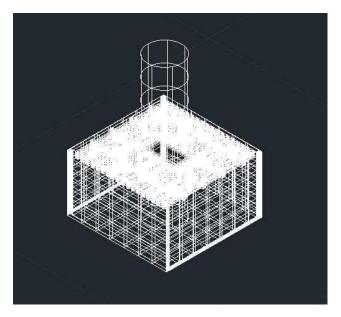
3D Wireframe detailed view design of customized cutlery pod using AutoCad 2019.
